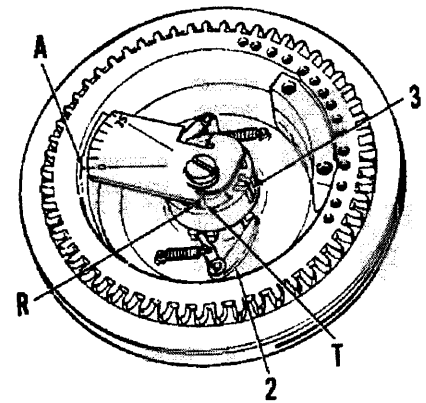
Advancer sleeve movement may be checked with special tool. Refer to text for inspection procedure.
